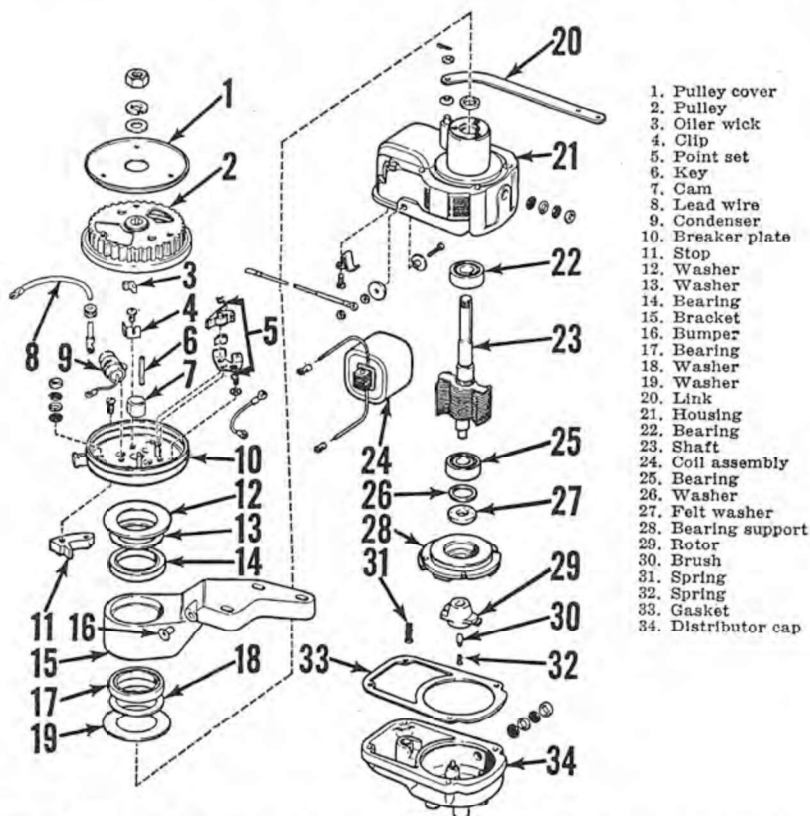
Exploded view of magneto of the type used. Magneto is belt driven from powerhead flywheel.
